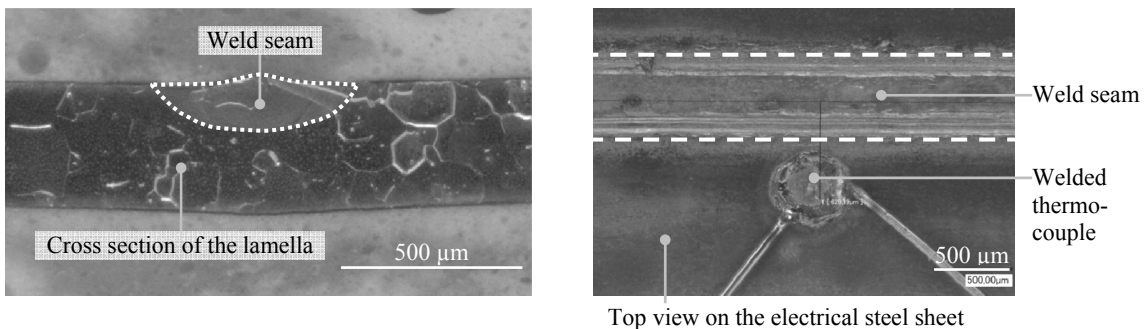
Left side: cross section of a weld seam, solidification isotherm is outlined white; right side: top view on a weld seam made on the single sheet configuration and a thermocouple, located at a distance of  $\Delta z = 630 \mu\text{m}$  from the weld seam center
